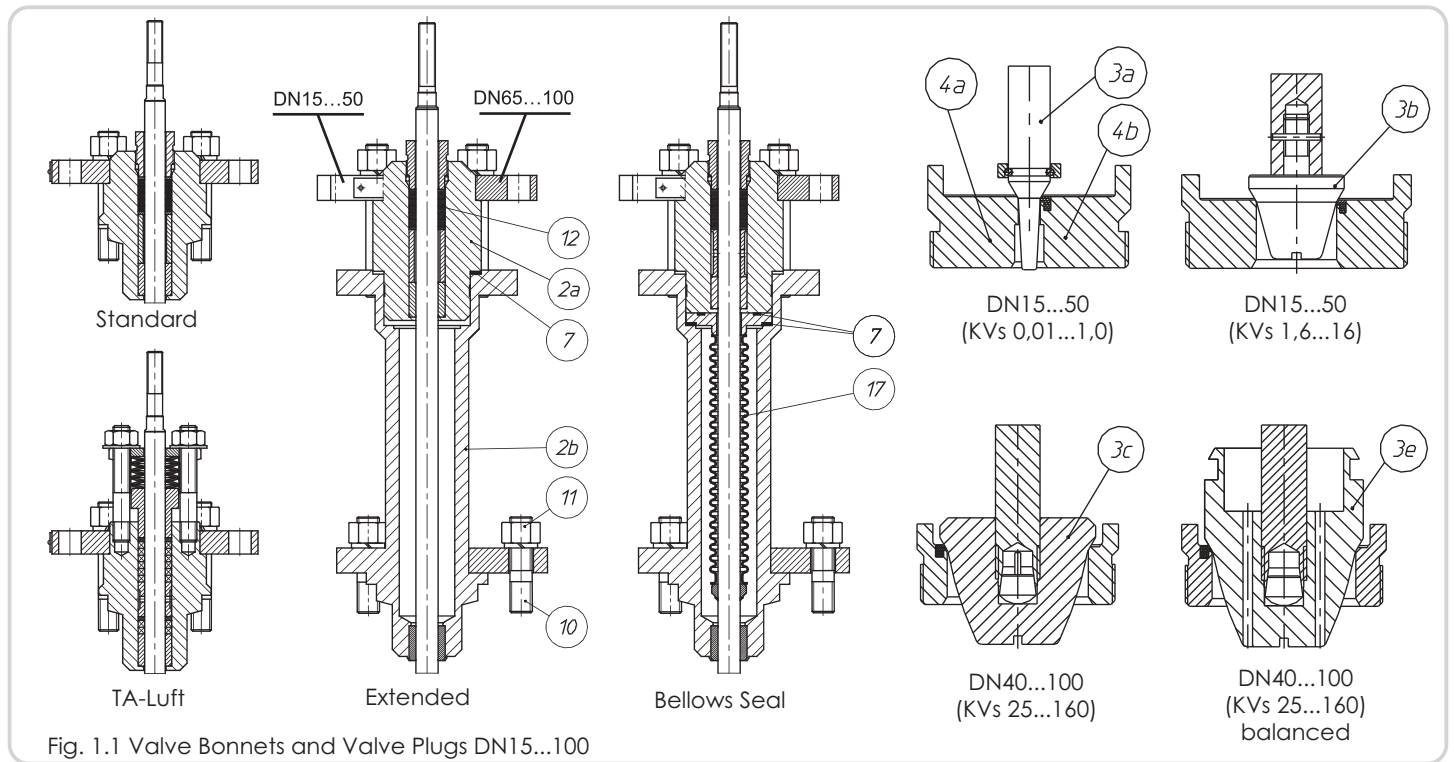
Valve Bonnets and Valve Plugs DN15...100
